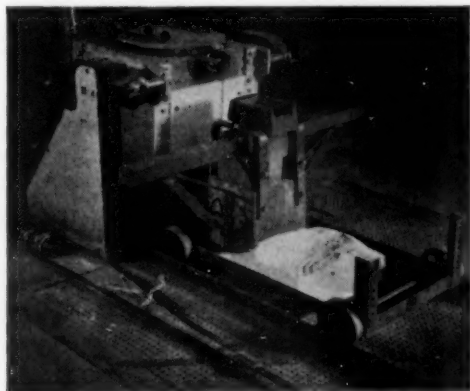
PHOTOGRAPH OF THE ASSEMBLED MOLD SHOWING THE MOLD IN POSITION FOR POURING.
